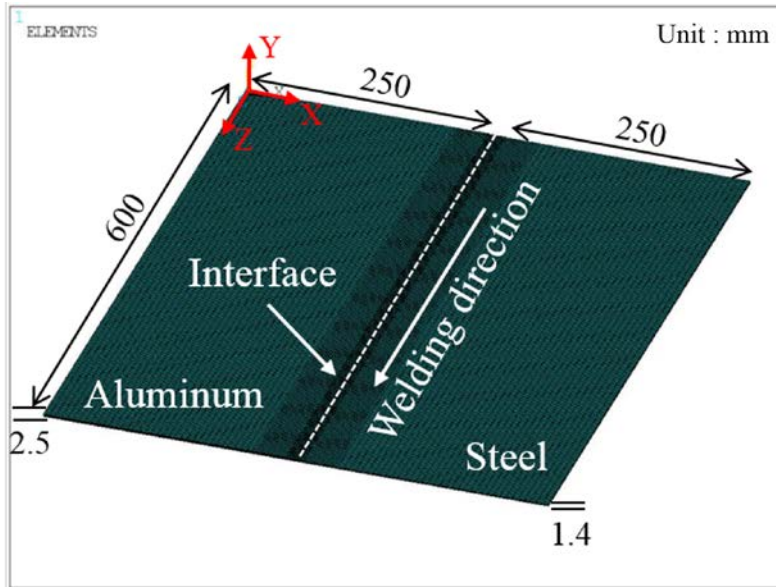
Configuration of numerical model for FSW and HFSW welded joints
